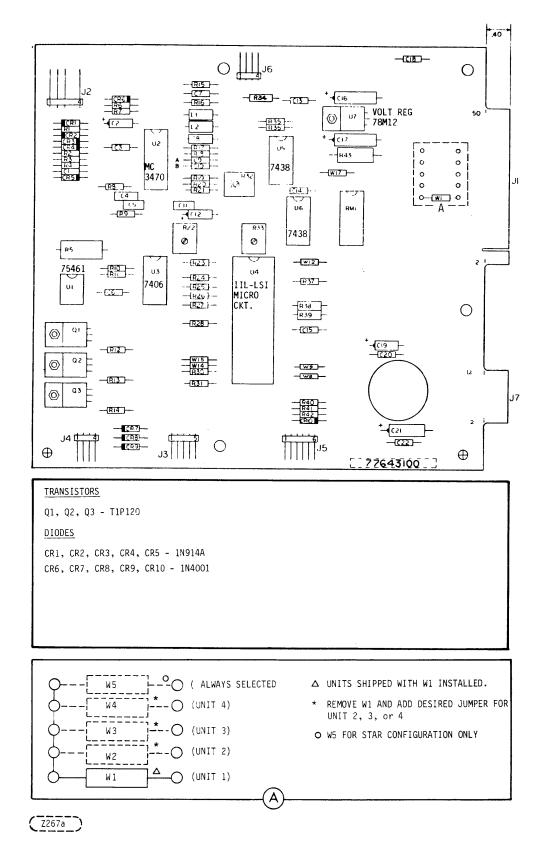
A. ASSEMBLY AND PARTS LIST (PWA 77643100)
